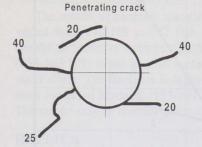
Penetrating cracks in water drum. Numbers show the depth of crack
